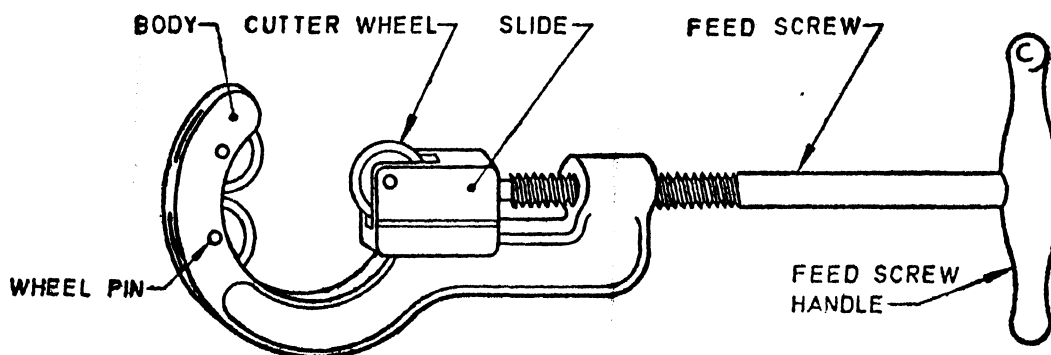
THREE-WHEEL TYPE PIPE CUTTER FOR CUTTING PIPE 45 TO 315 mm DIAMETER INCLUSIVE, TYPICAL
